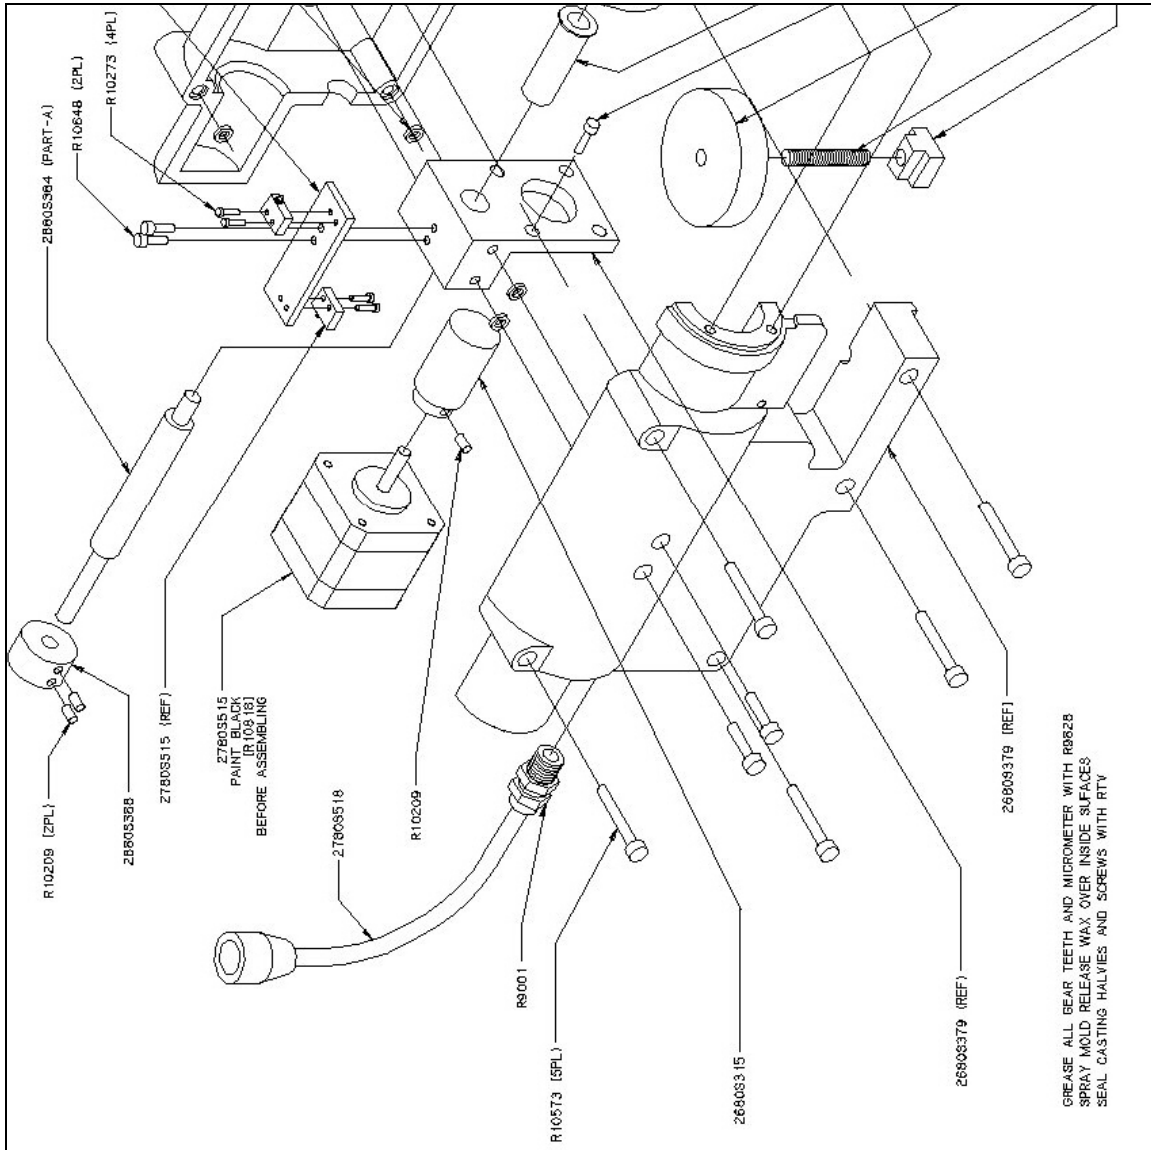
X-Table Assembly Diagram (11-2750) Part B
